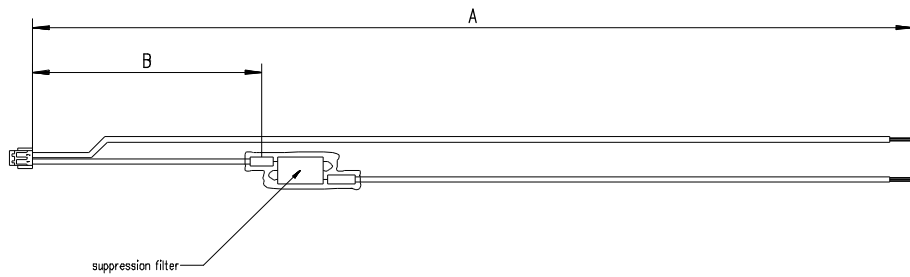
Power Supply Cable with Filtercoil ETV2
